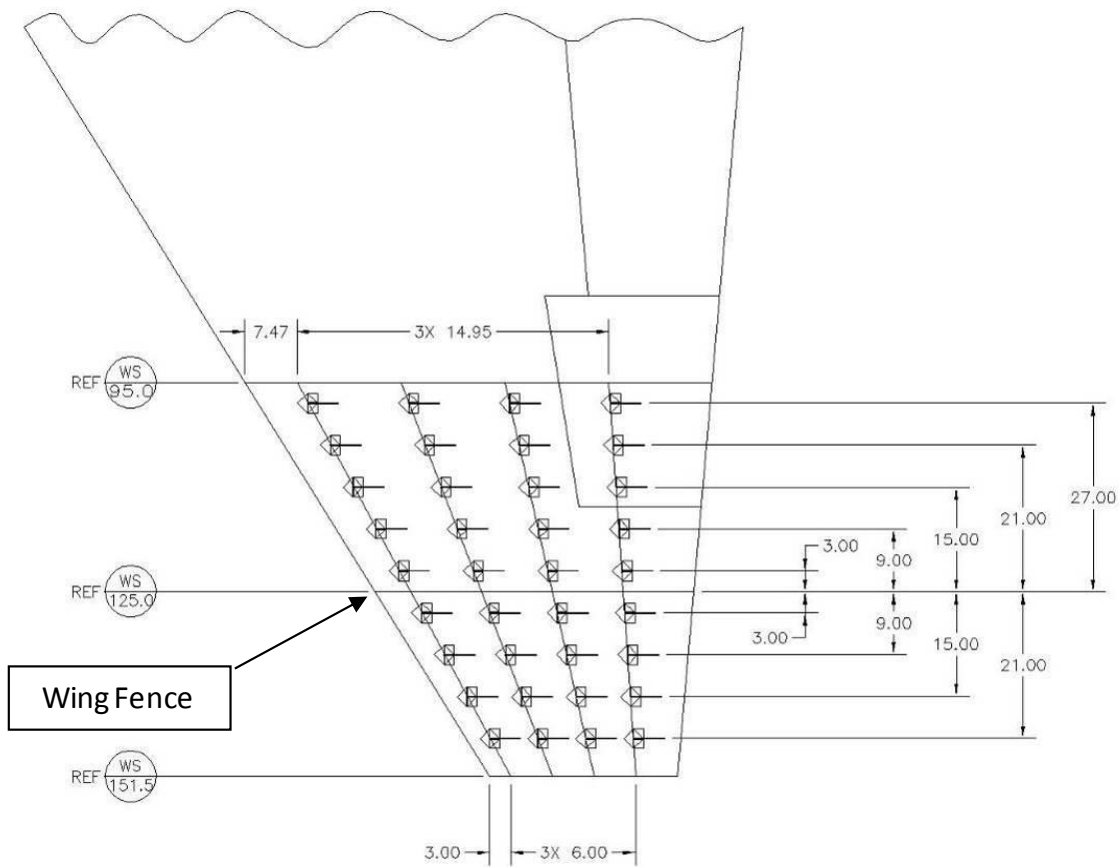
Flight Test Wing Tuft Layout (in inches) (1)
